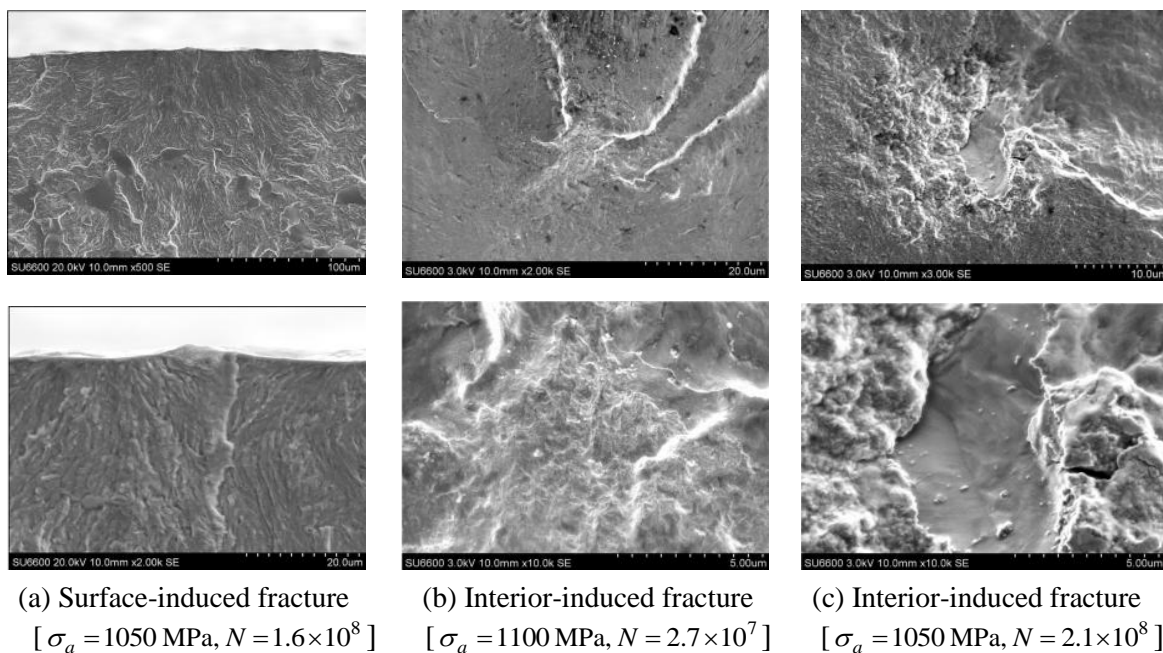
Typical examples of fracture surfaces for SWOSC-V steel in rotating bending
